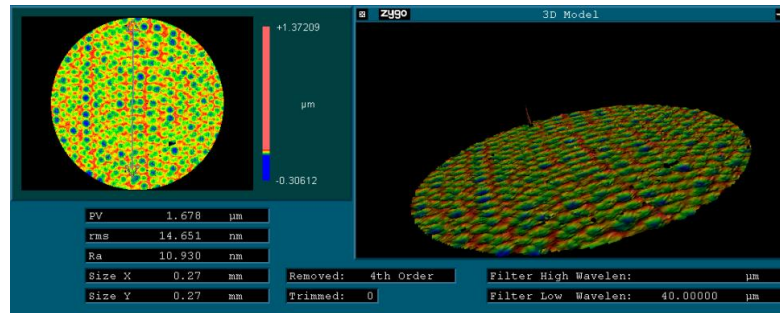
Micro-milling tool imprint on a plastic lens when chip per tooth is too large. The height and spacing of the divots depends on spindle speed, feed rate, and tool size. This surface was obtained using a 0.53 mm radius tool at a 14 μm chip per tooth.
